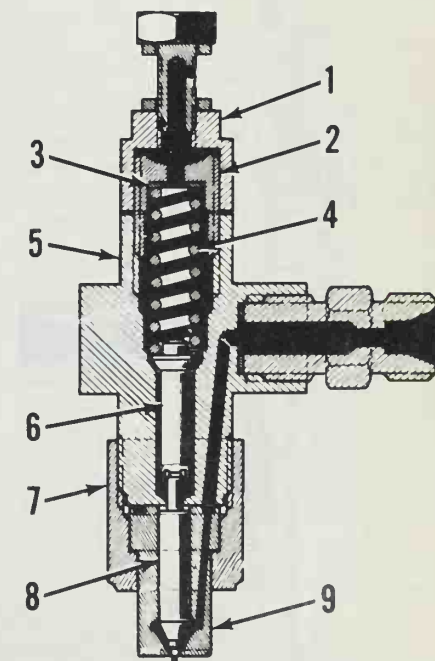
Cross-sectional view of Roto Diesel injector.
